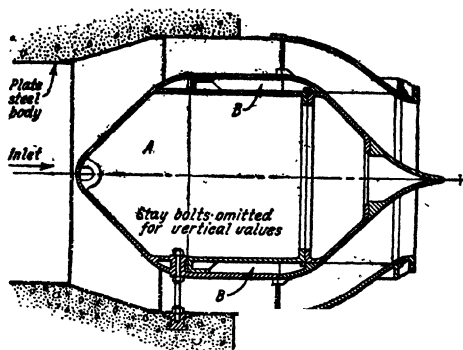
Type "B" Johnson Hydraulic Valve,
